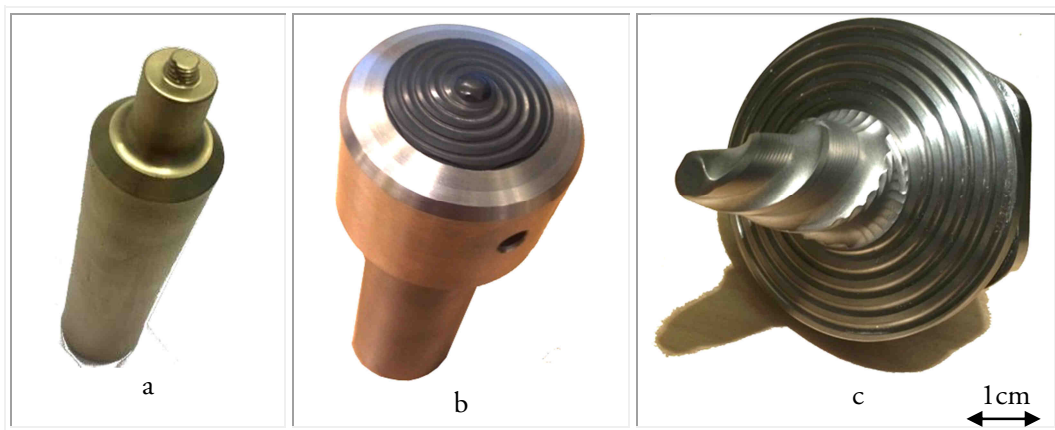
Three different FSW tool designs: steel tool for thin aluminium overlap joints (a), PCBN tool for high-temperature alloys with convex scrolled shoulder (b) and tungsten tool for thick copper with MX Triflute™ pin geometry (c)
